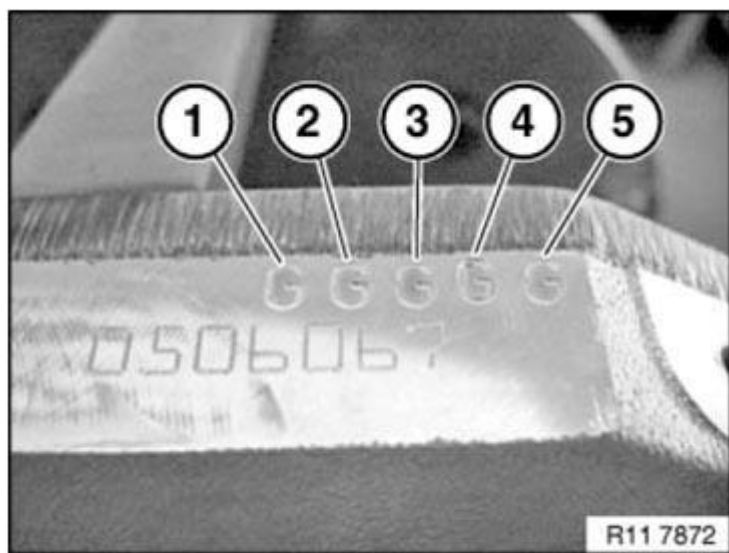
Identifying Color Assignment In Crankcase 1 To 5
